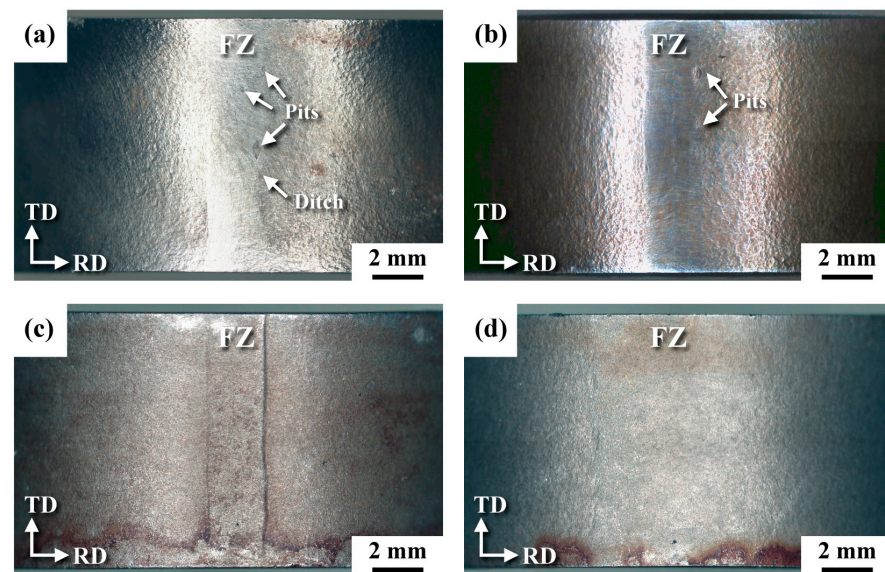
The typical surface morphologies of the U-bend samples after salt spray. (a) 304 weld, (b) 316 weld, (c) micro-shot peened 304 weld and (d) micro-shot peened 316 weld.
